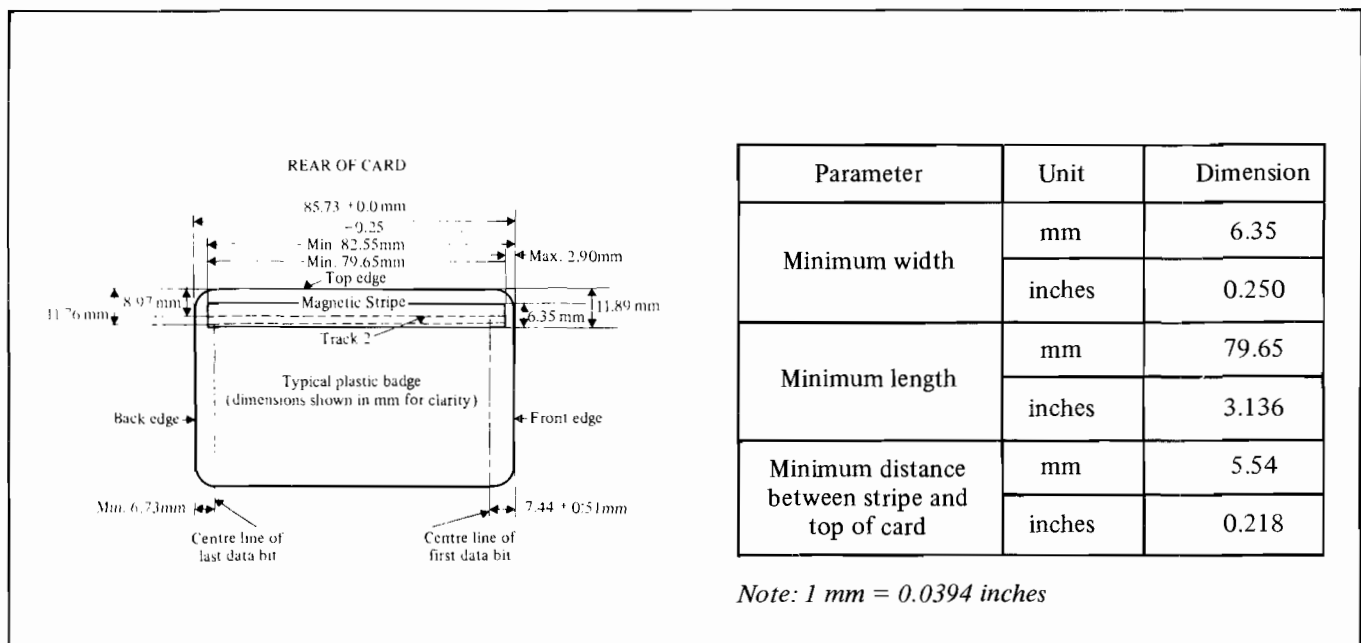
Plastic Badge Magnetic Stripe Dimensions
